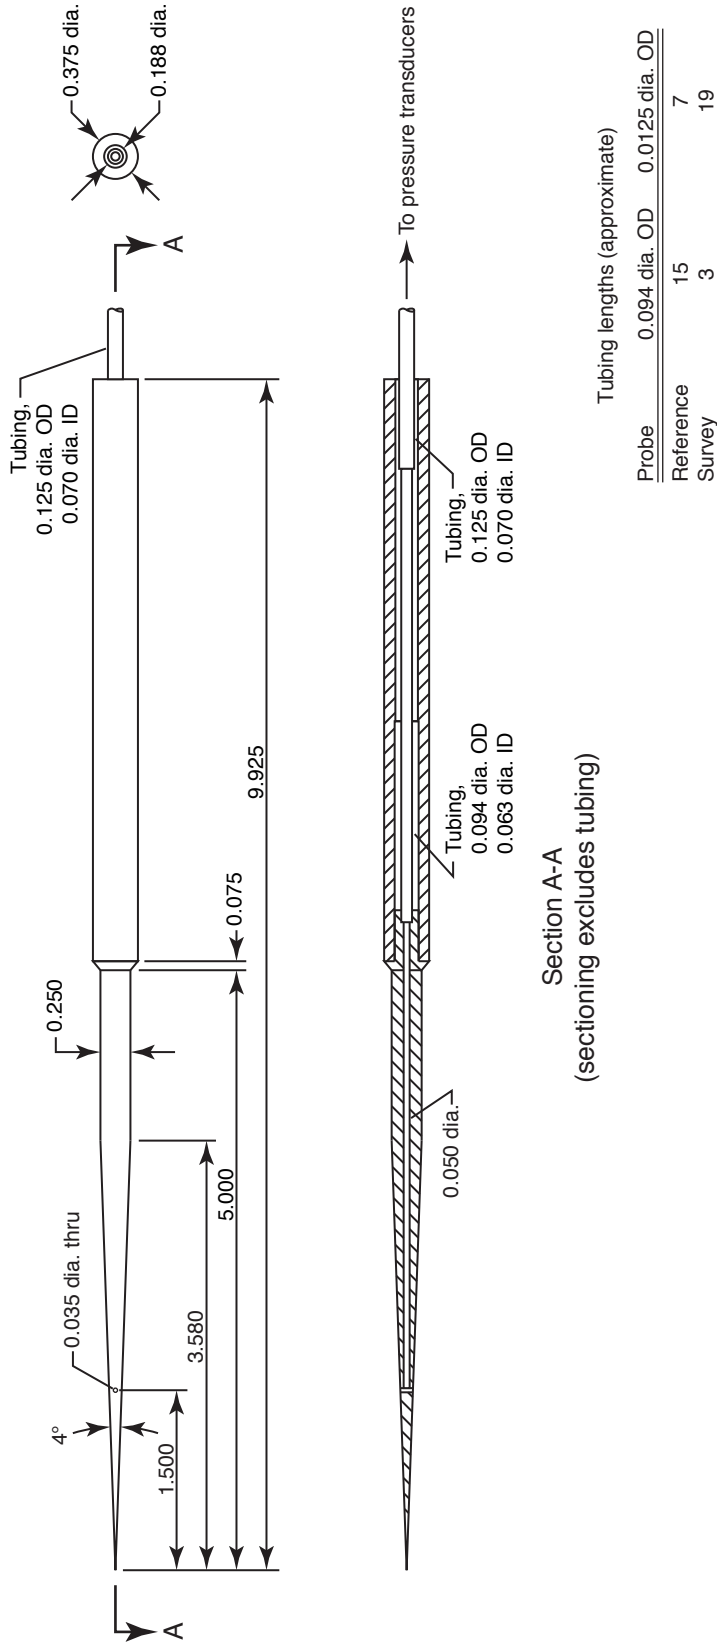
Reference and survey probe drawing. All dimensions are in inches unless otherwise noted.
